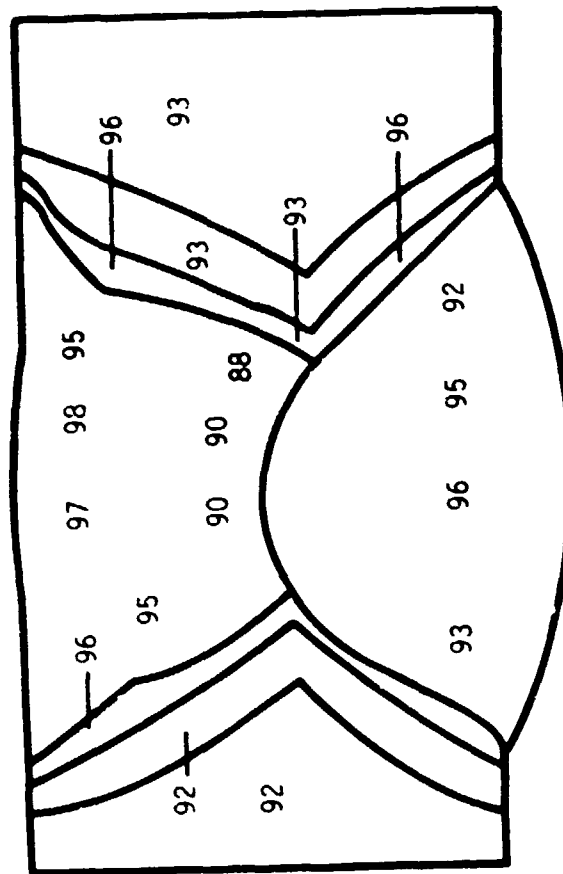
Rockwell B Hardness for Pipeline Weld.
